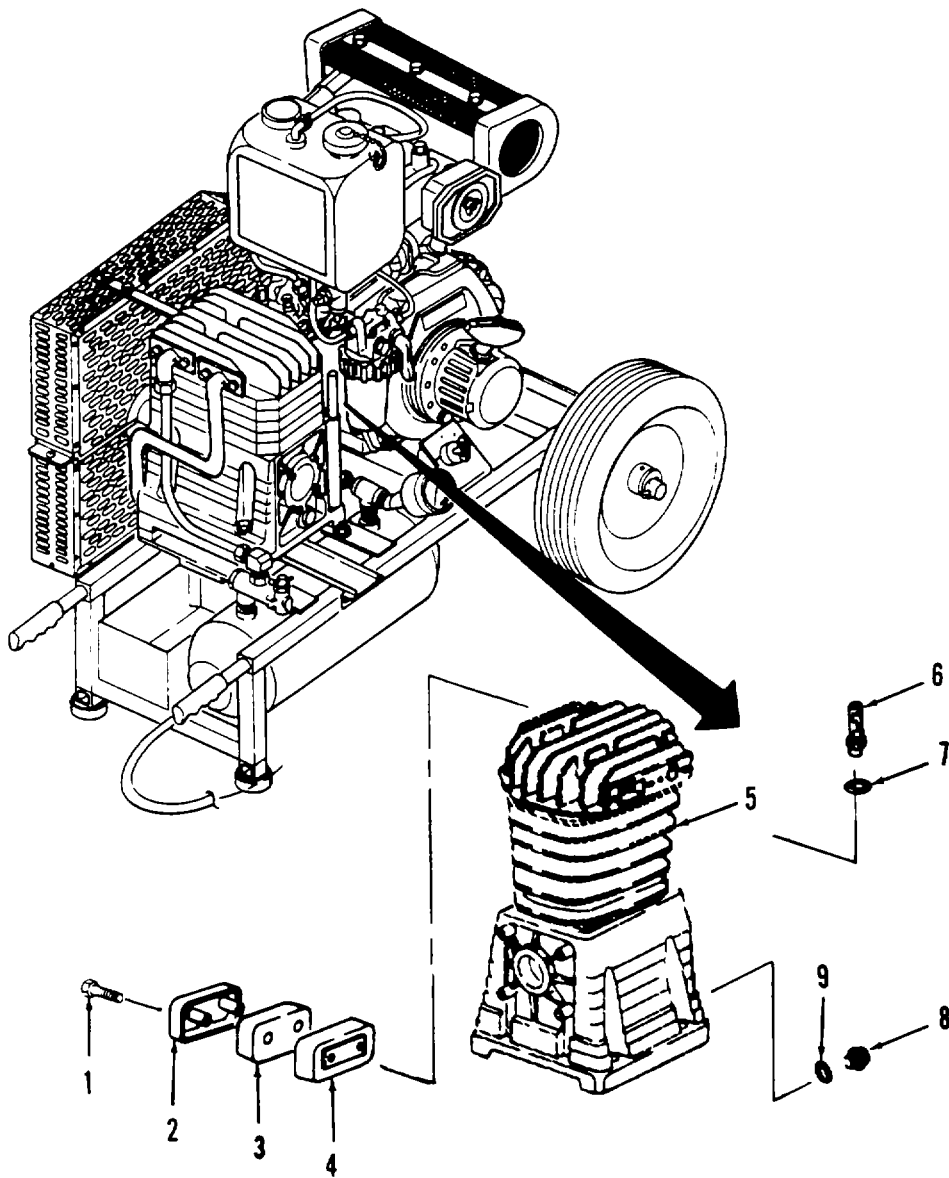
Filter Assembly, Oil Filler/Breather, and Sight Glass Replacement.
